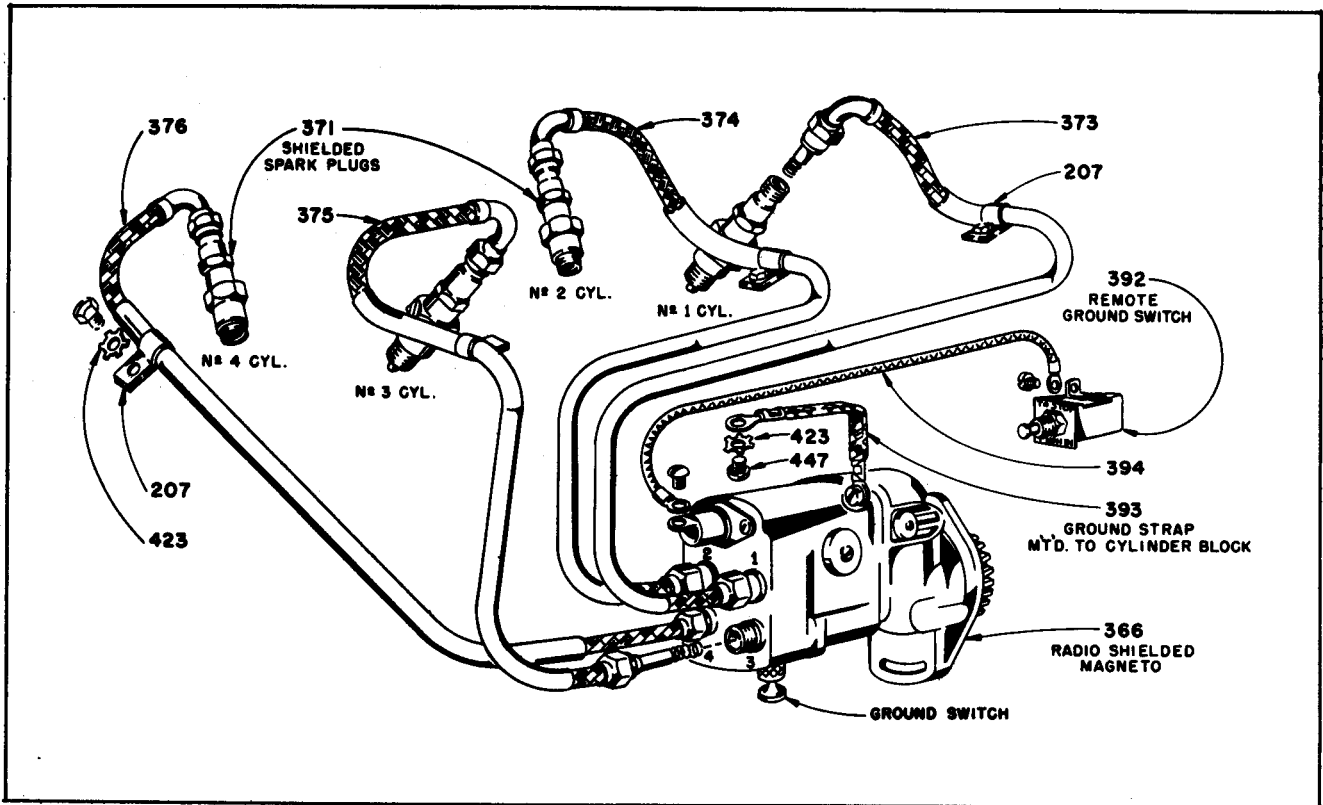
, RADIO SHIELDED MAGNETO IGNITION FOR MIL-E-11275-C ENGINES
